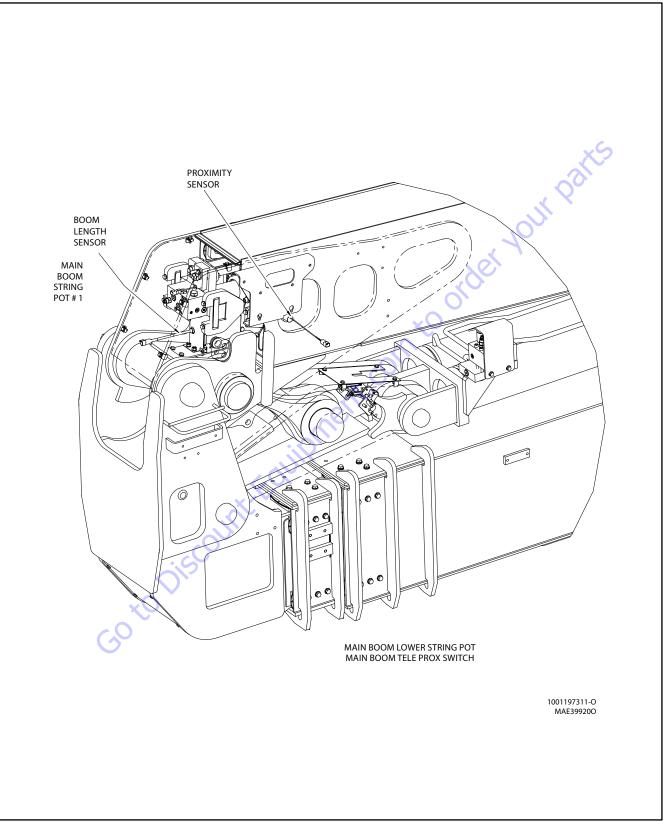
Boom Sensors Installation - Sheet 9 of 13
